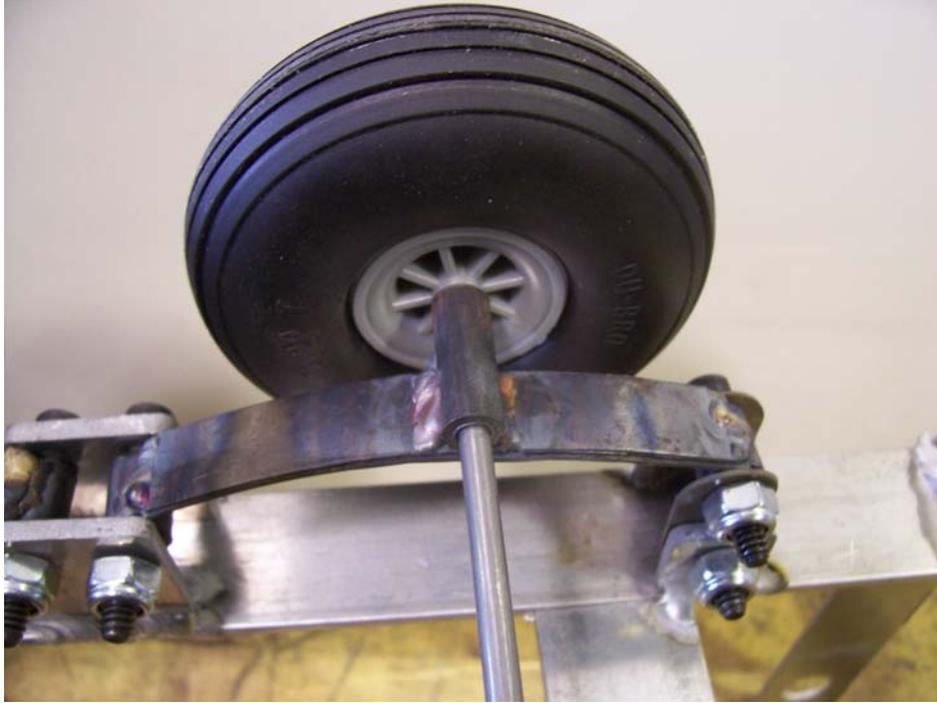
The axle running through the sleeve on the front driver side leaf spring
